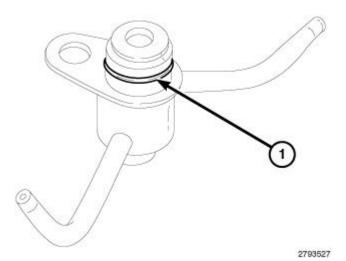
Piston Oil Cooler Jet & Bolt Courtesy of CHRYSLER GROUP, LLC
